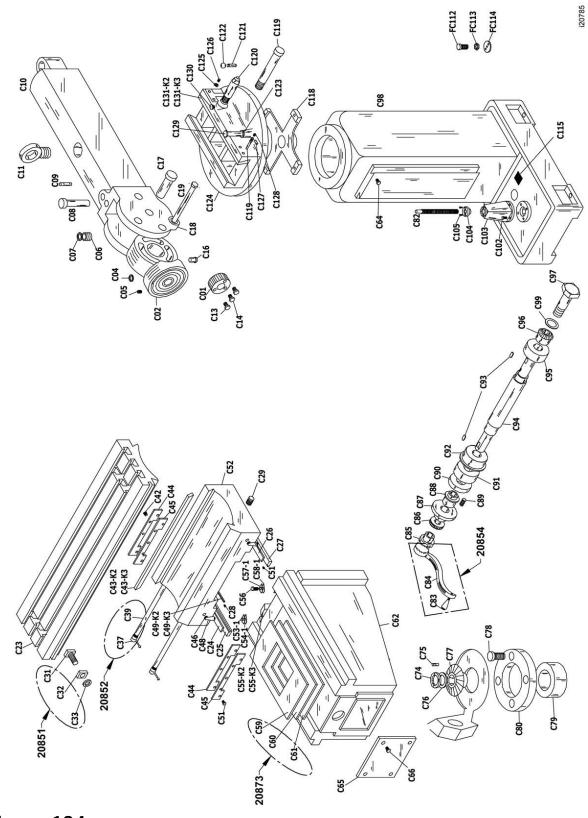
K2/K3 Base Machine P/N 20785 Parts List – K2 & K3 Base Machine (reference only)
